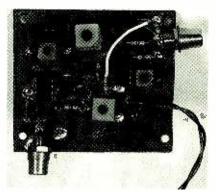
THE COMPLETED BOARD. IC sockets are not recommended because it is difficult to solder the grounded pins on both sides with sockets in place.
